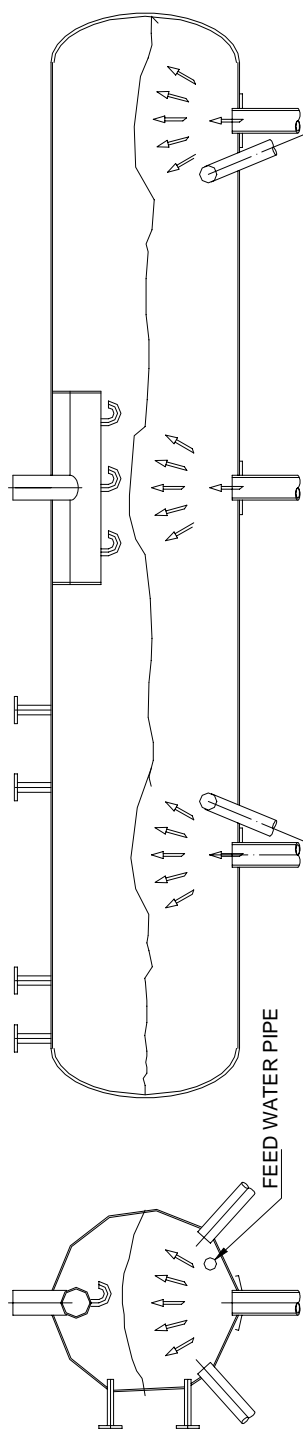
EXISTING DRUM INTERNAL ARRANGEMENT
